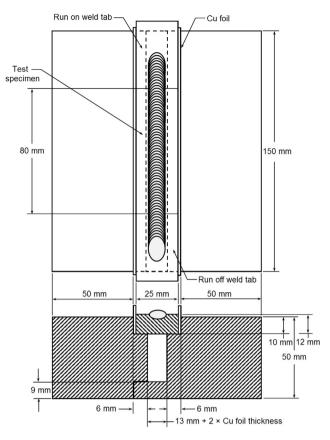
A diagram showing the test specimen assembly in the welding test jig and a single weld bead.
